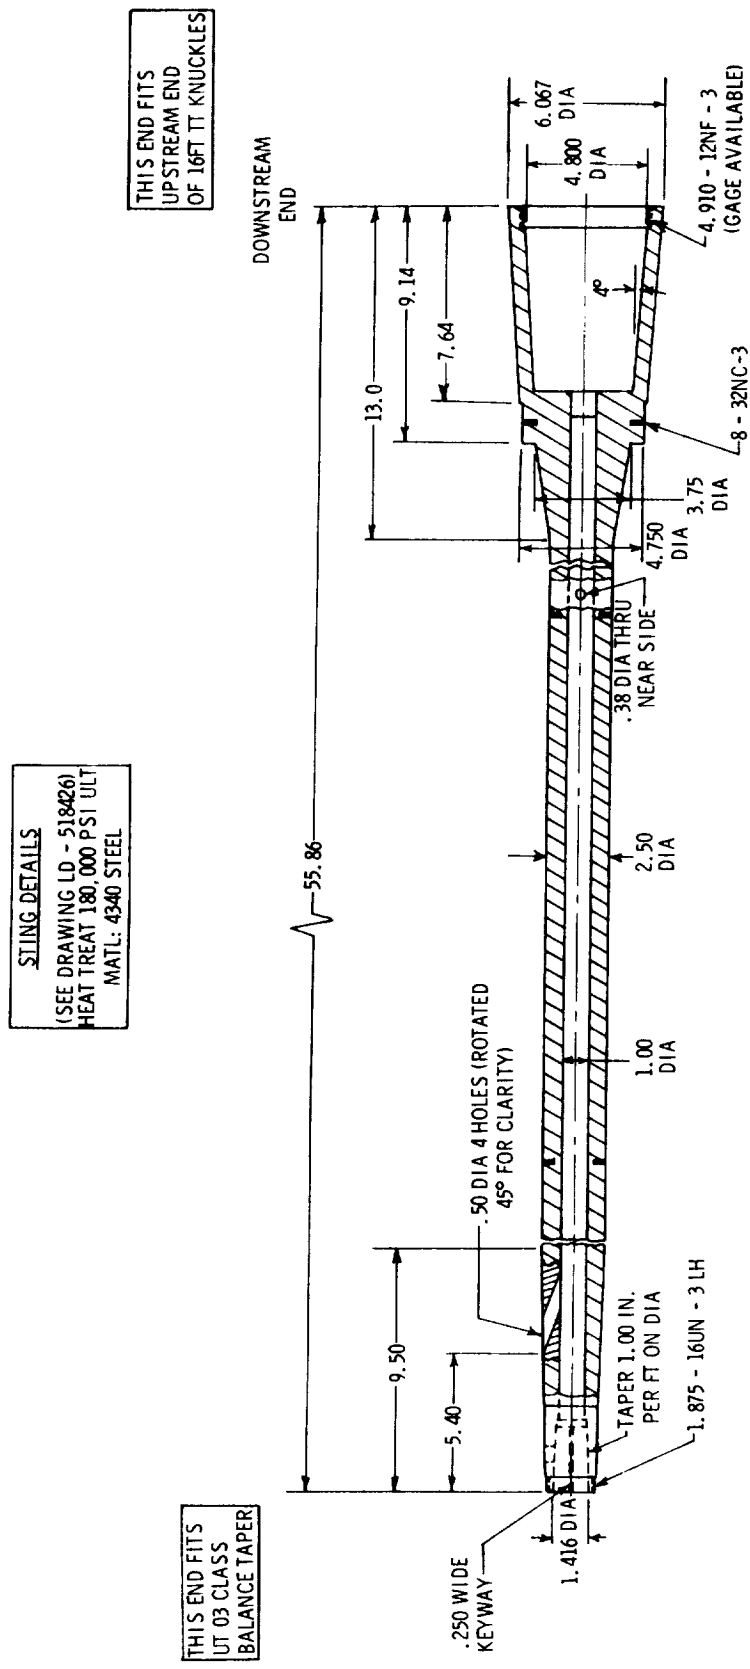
Sketch of sting LD-518426. (All dimensions are in inches unless otherwise indicated.)
